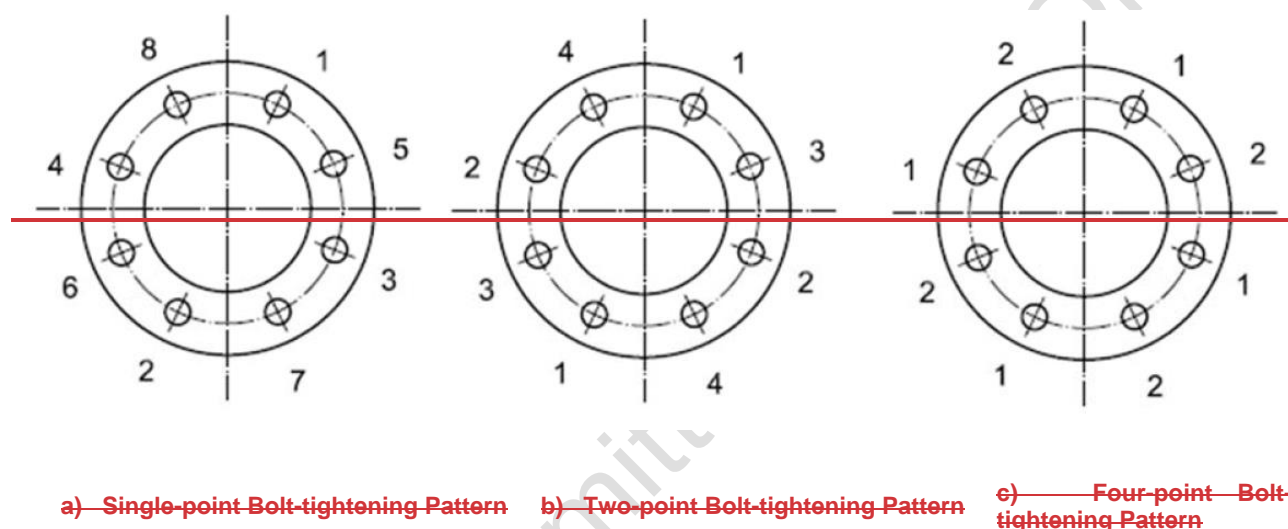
Cross-bolt Torque Tightening Sequence for One Tool, Two Tools, and Four Tools
